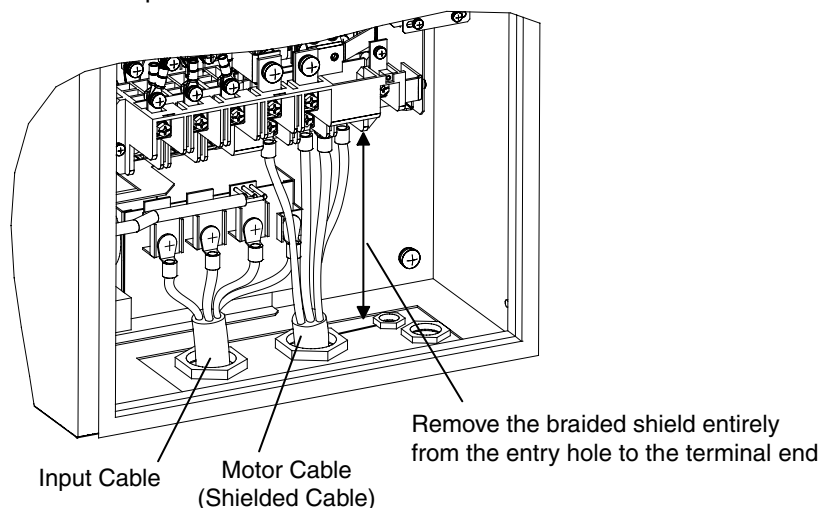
Motor cable shielding with Inverters of 22 and 30 kW
